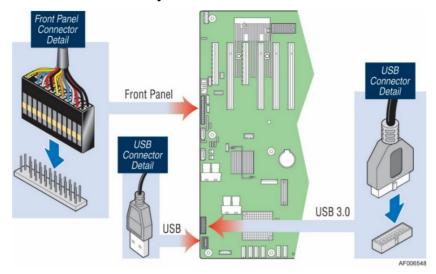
Connecting Front Panel Cables - S2600CW Board Family
